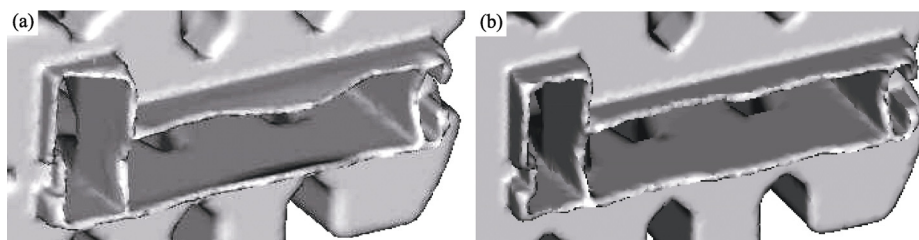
Shapes of the extruded section in the shape forming stage: (a) before optimization; (b) after optimization.
